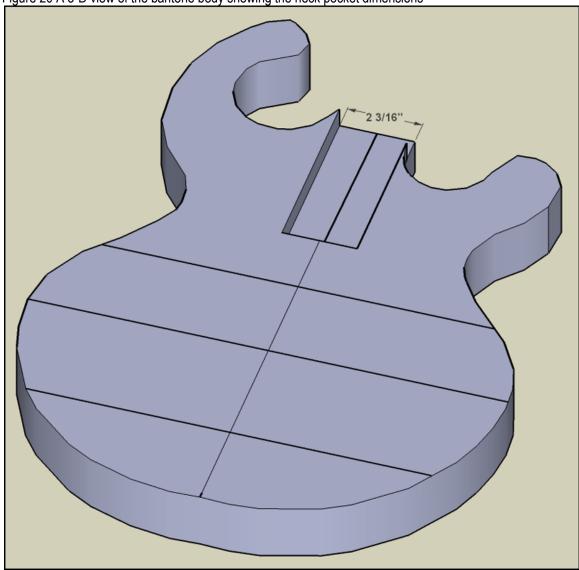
A 3-D view of the baritone body showing the neck pocket dimensions
